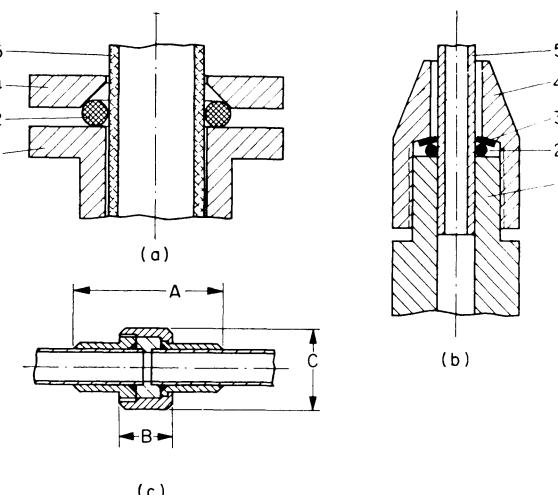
Seals having the conical part on atmospheric side: (a) flange seal; (b) union; (c) double joint; (1) flange; (2) O-ring; (3) metal washer; (4) conical part; (5) joined tube
